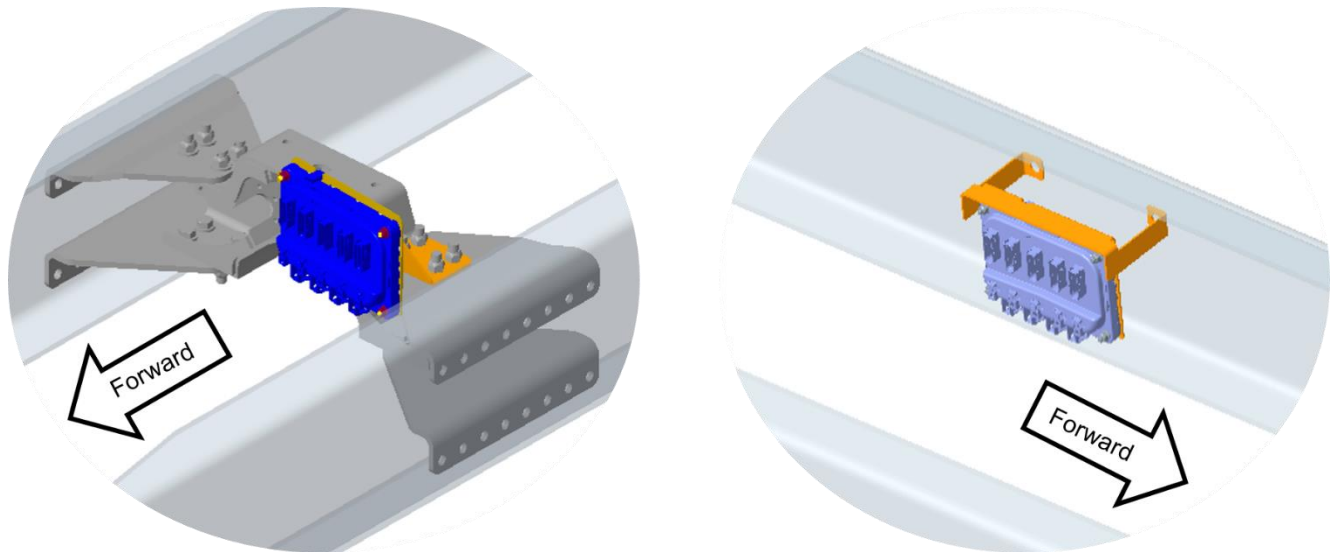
Chassis Module Location (Left) – Secondary Chassis Module location (Right)
